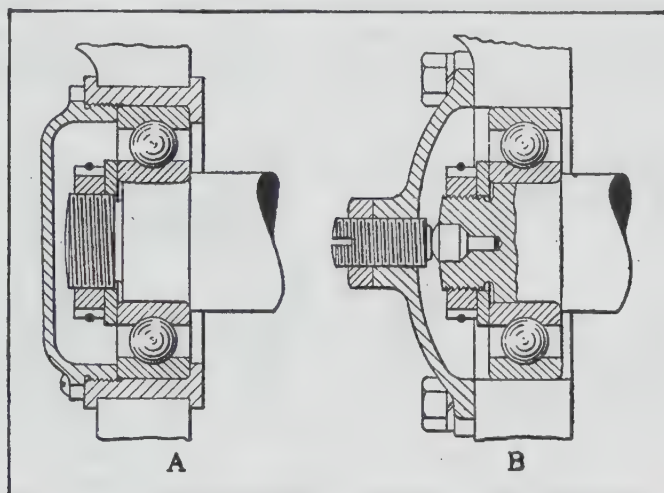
MOUNTING FOR SECONDARY SHAFT BEARINGS.
